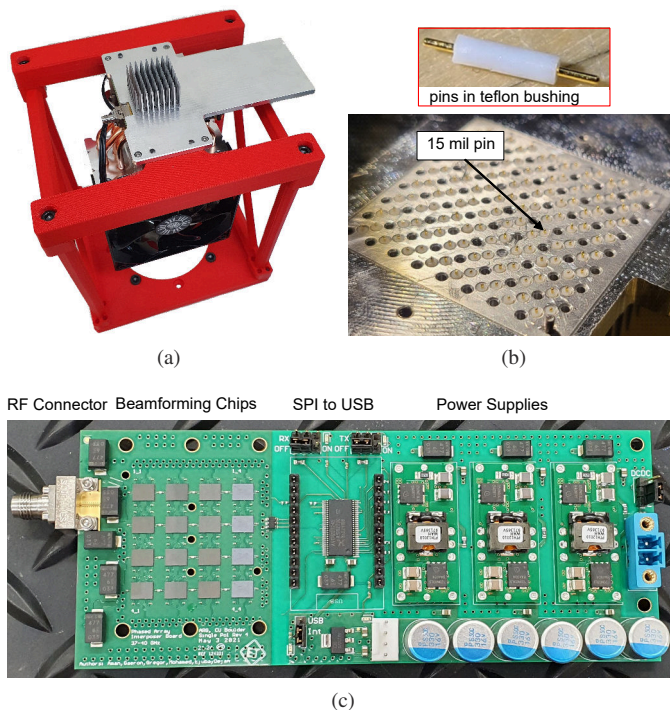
Photo of the assembled array mounted in the chamber fixture (a), detail of aperture during assembly highlighting pin interconnects (b), interposer PCB view of the component side (c).
